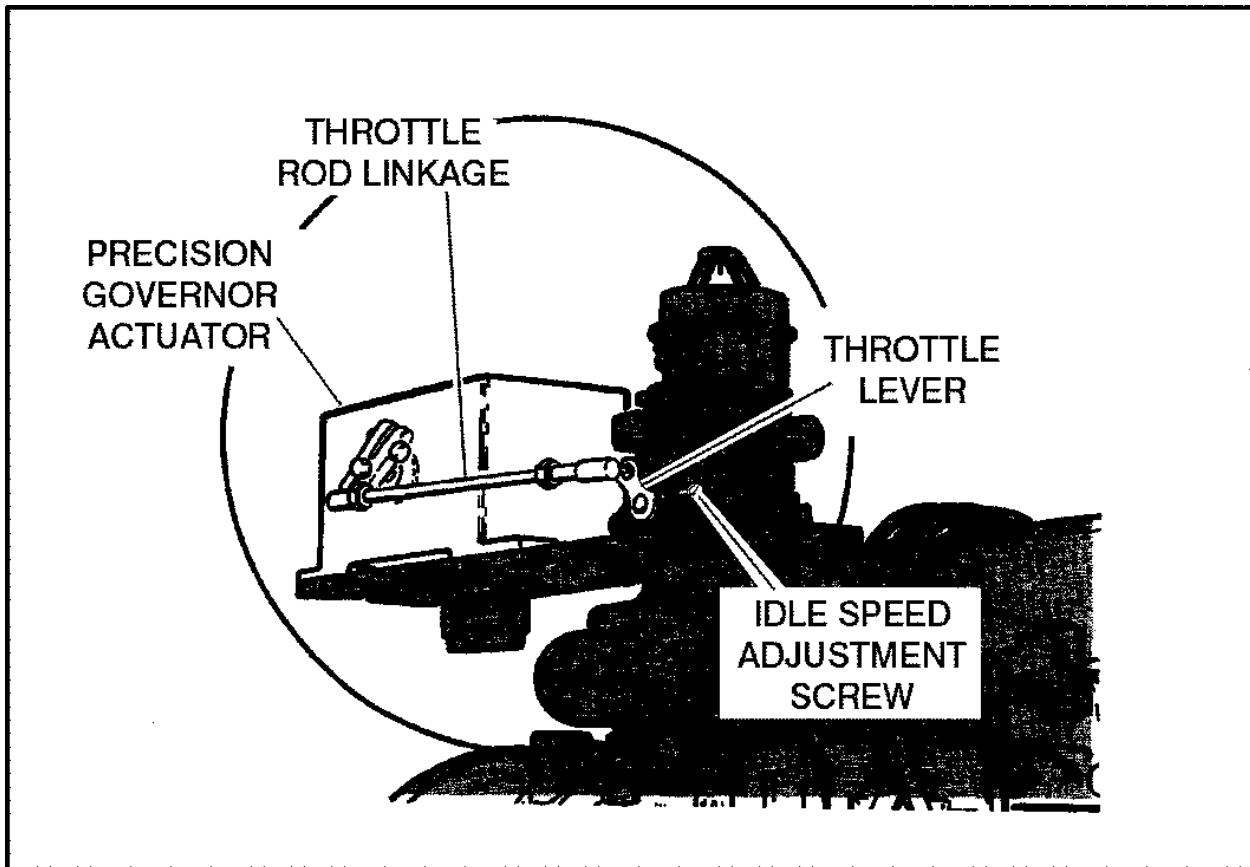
Throttle Checks and Adjustments - Ford VSG 413
